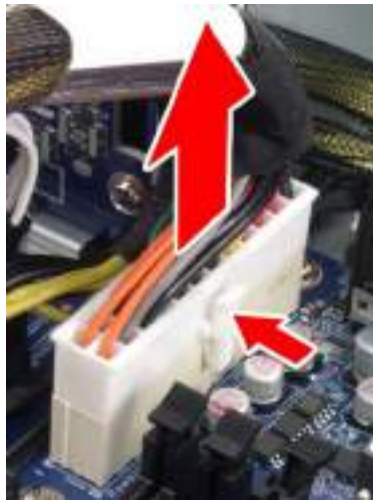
Remove 24-Pin Mainboard-to-Power Connector from Mainboard
